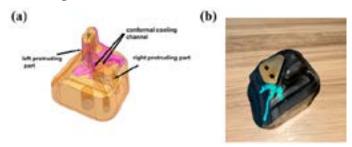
Die insert geometry and cracked die insert: (a) geometry; (b) die insert.
